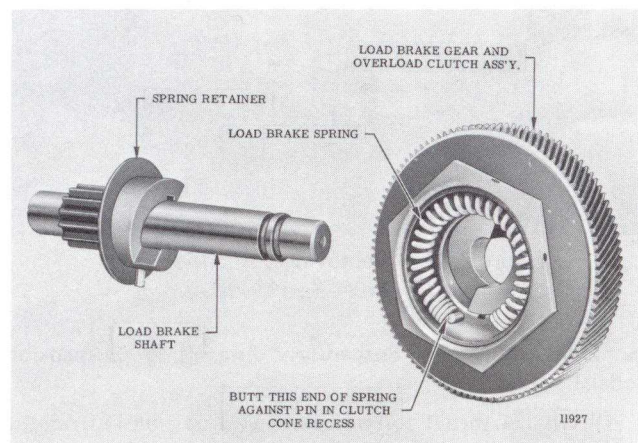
Load Brake Gear and Overload Clutch Assembly Removed from Load Brake Shaft Showing Brake Spring Installed in Clutch Cone
